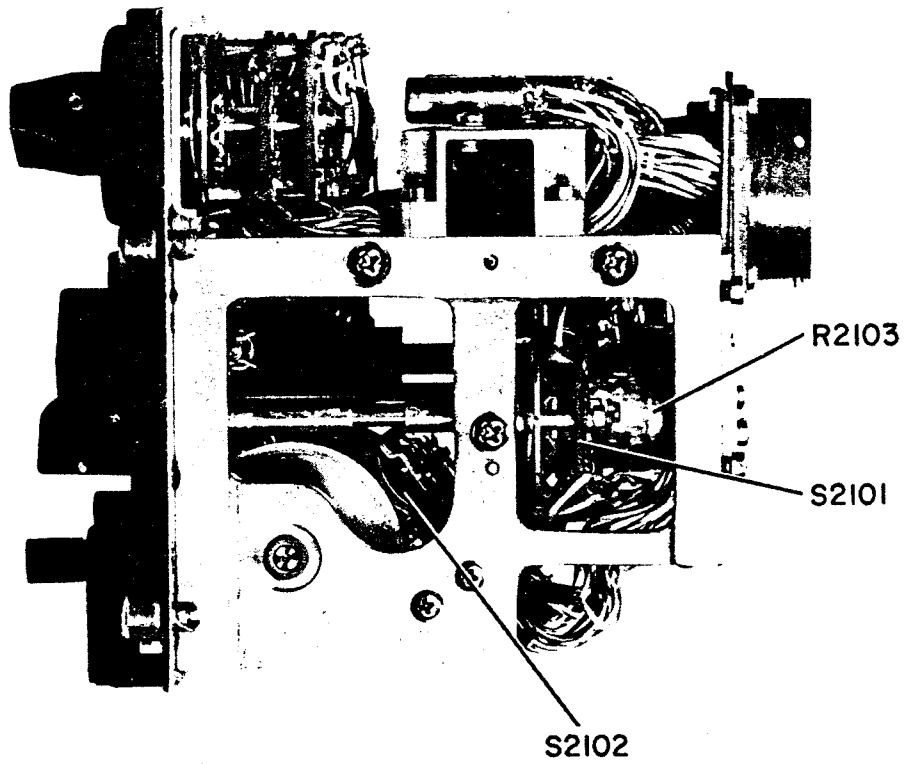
Radio Set Control C-2791 ARC, Right Side View, Cover Removed
